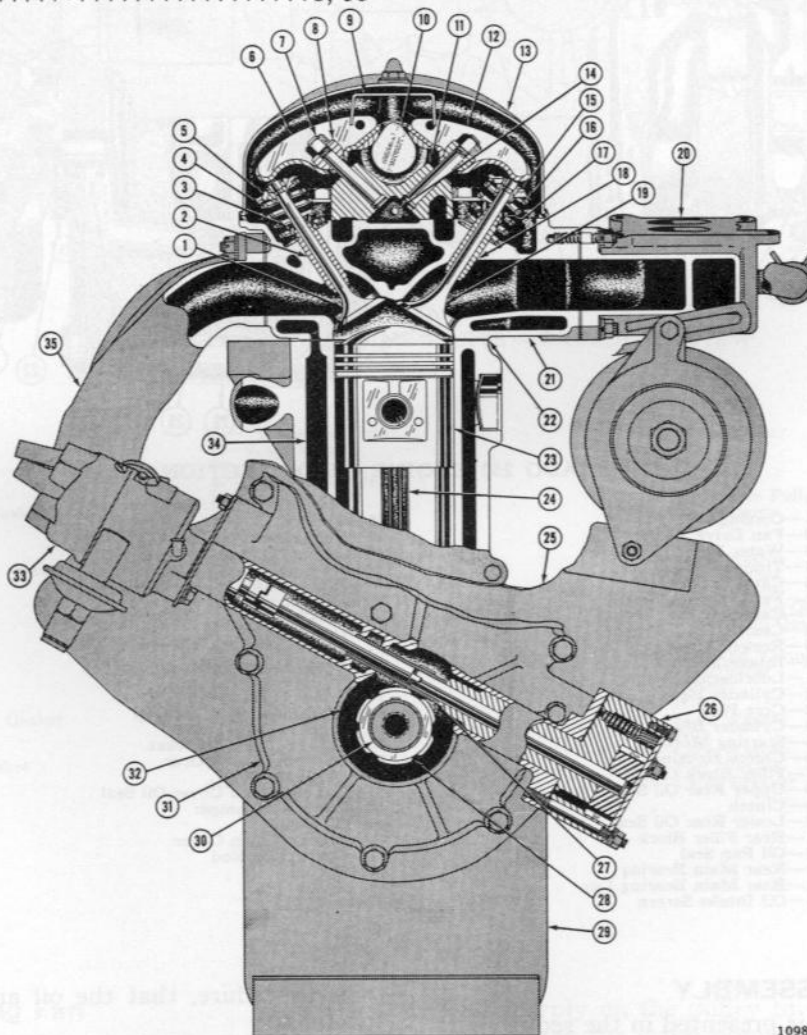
TORNADO 230 ENGINE—FRONT SECTIONAL VIEW
